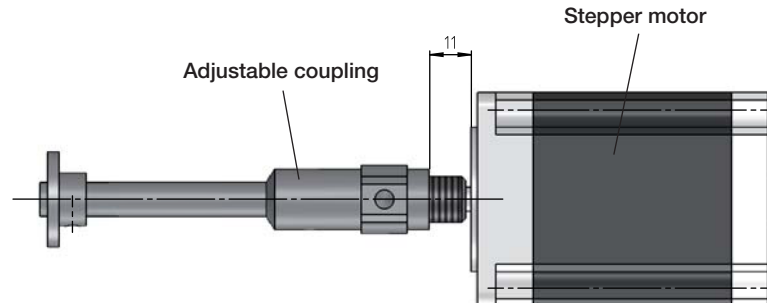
Adjustable coupling – stepper motor flange adjustment measurement
